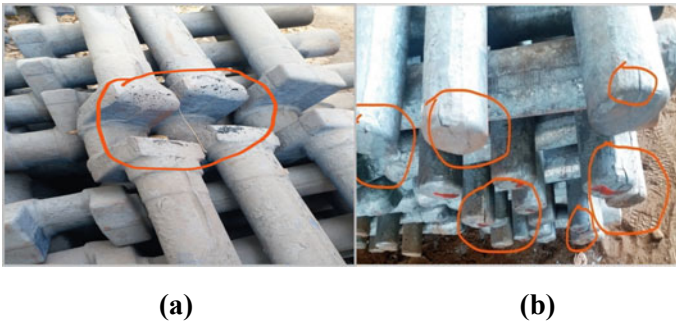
Burnt at bottom of web (a) and at end Journal and (b) in overheated forgings. *Source* Forge & Forge Pvt. Ltd. Rajkot [11]
